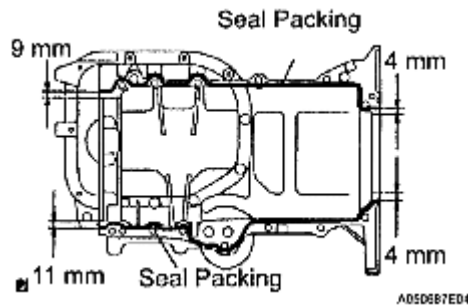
Identifying Oil Pan Sub-Assembly Dimension
